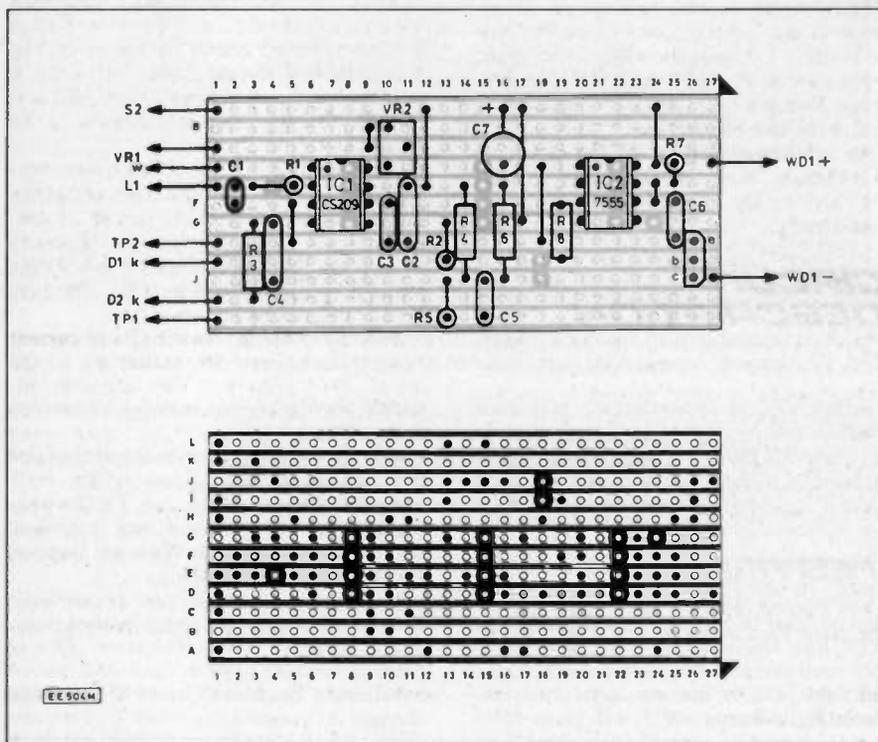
Stripboard component layout and details of breaks required in the underside copper tracks. IC1 and IC2 should be mounted in i.c. sockets.
